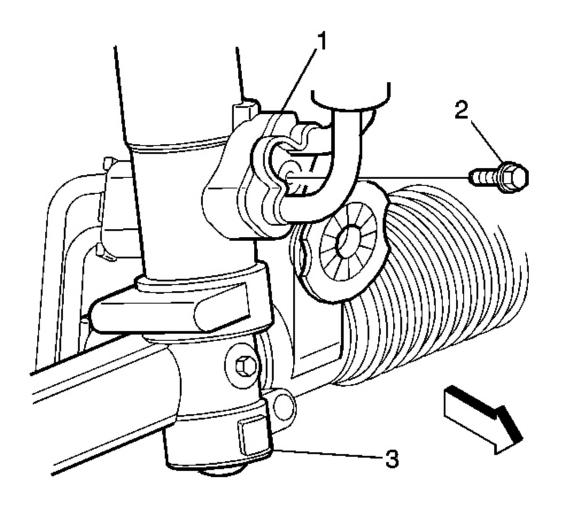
Disconnecting/Reconnecting Power Steering Hose Assembly To Power Steering Gear
